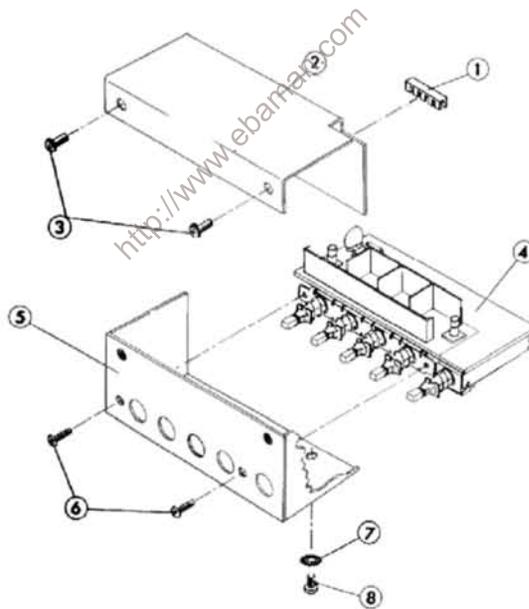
Exploded View of Q Range Attenuator Ass'y
